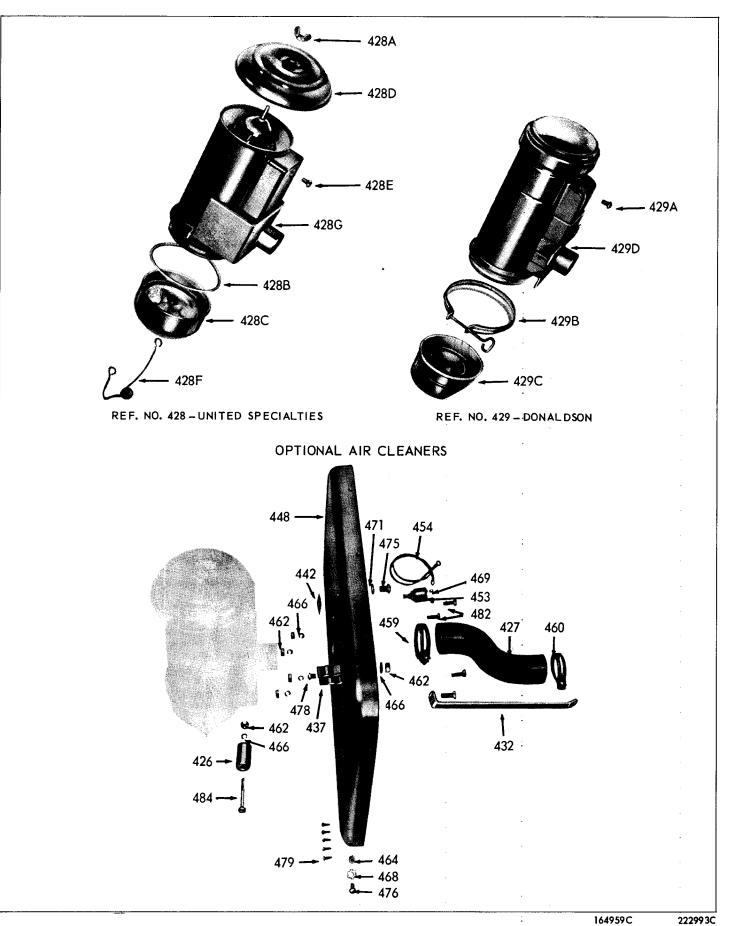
, END PANEL AND AIR CLEANER FOR ENGINE HOUSE WITH FUEL TANK AT TAKE-OFF END Parts are identified by reference number. See parts list for correct part number.
